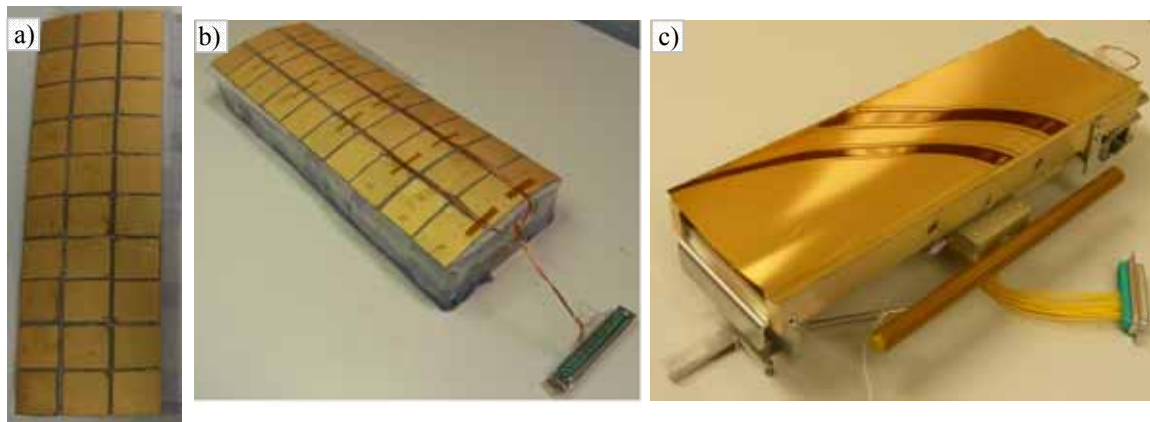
The LAXRO prototype. a) After bonding of the piezoelectric actuators. b) After harnessing. c) After bonding to the support structure.
